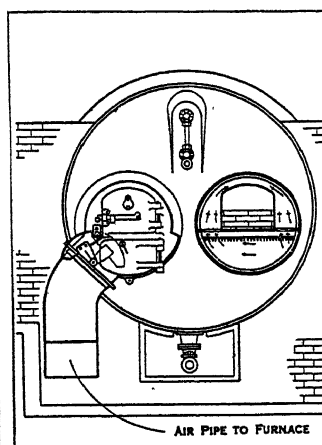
"USCO" IMPELLED DRAUGHT SYSTEM APPLIED TO A LANCASHIRE BOILER
